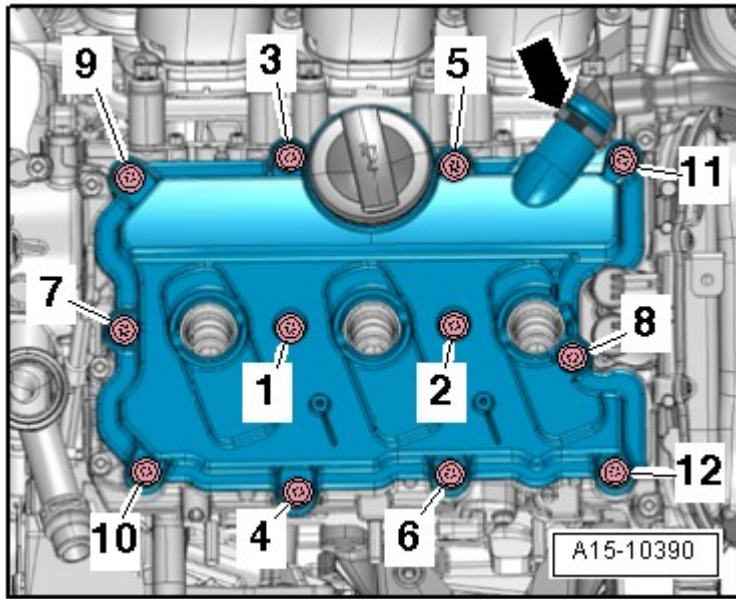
Left Cylinder Head Cover Bolt Tightening Sequence & Specification
